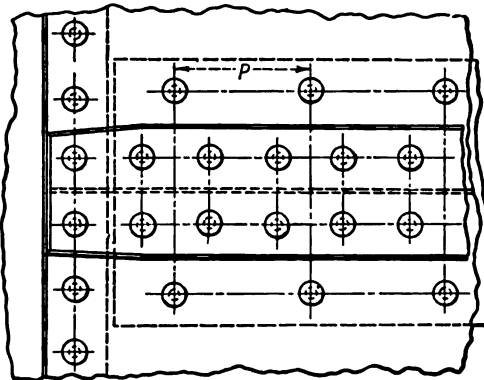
BUTT AND DOUBLE STRAP JOINT, DOUBLE-RIVETED.
